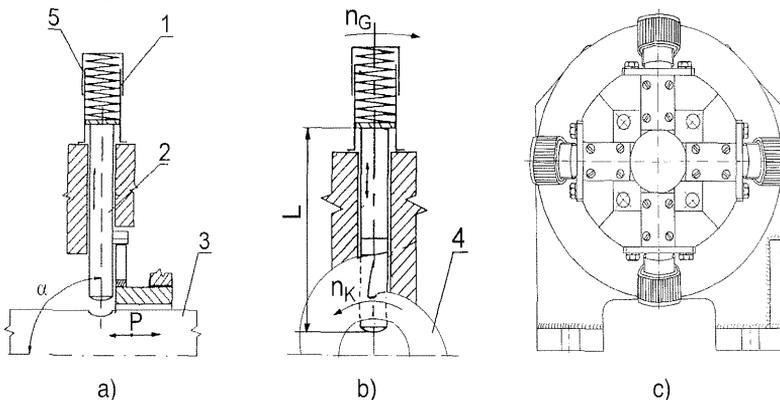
Scheme of the percussive device for percussive burnishing process: a) mechanism elements and processed shaft, b) mechanism with the cam, c) percussive burnishing head; 1 - spring, 2 – percussive element, 3 – processed shaft, 4 – cam, 5 - adjusting nut,  $n_K$  – cam rotation speed,  $n_G$  – head rotation speed, L – length of percussive element,  $\alpha$  - striking angle
